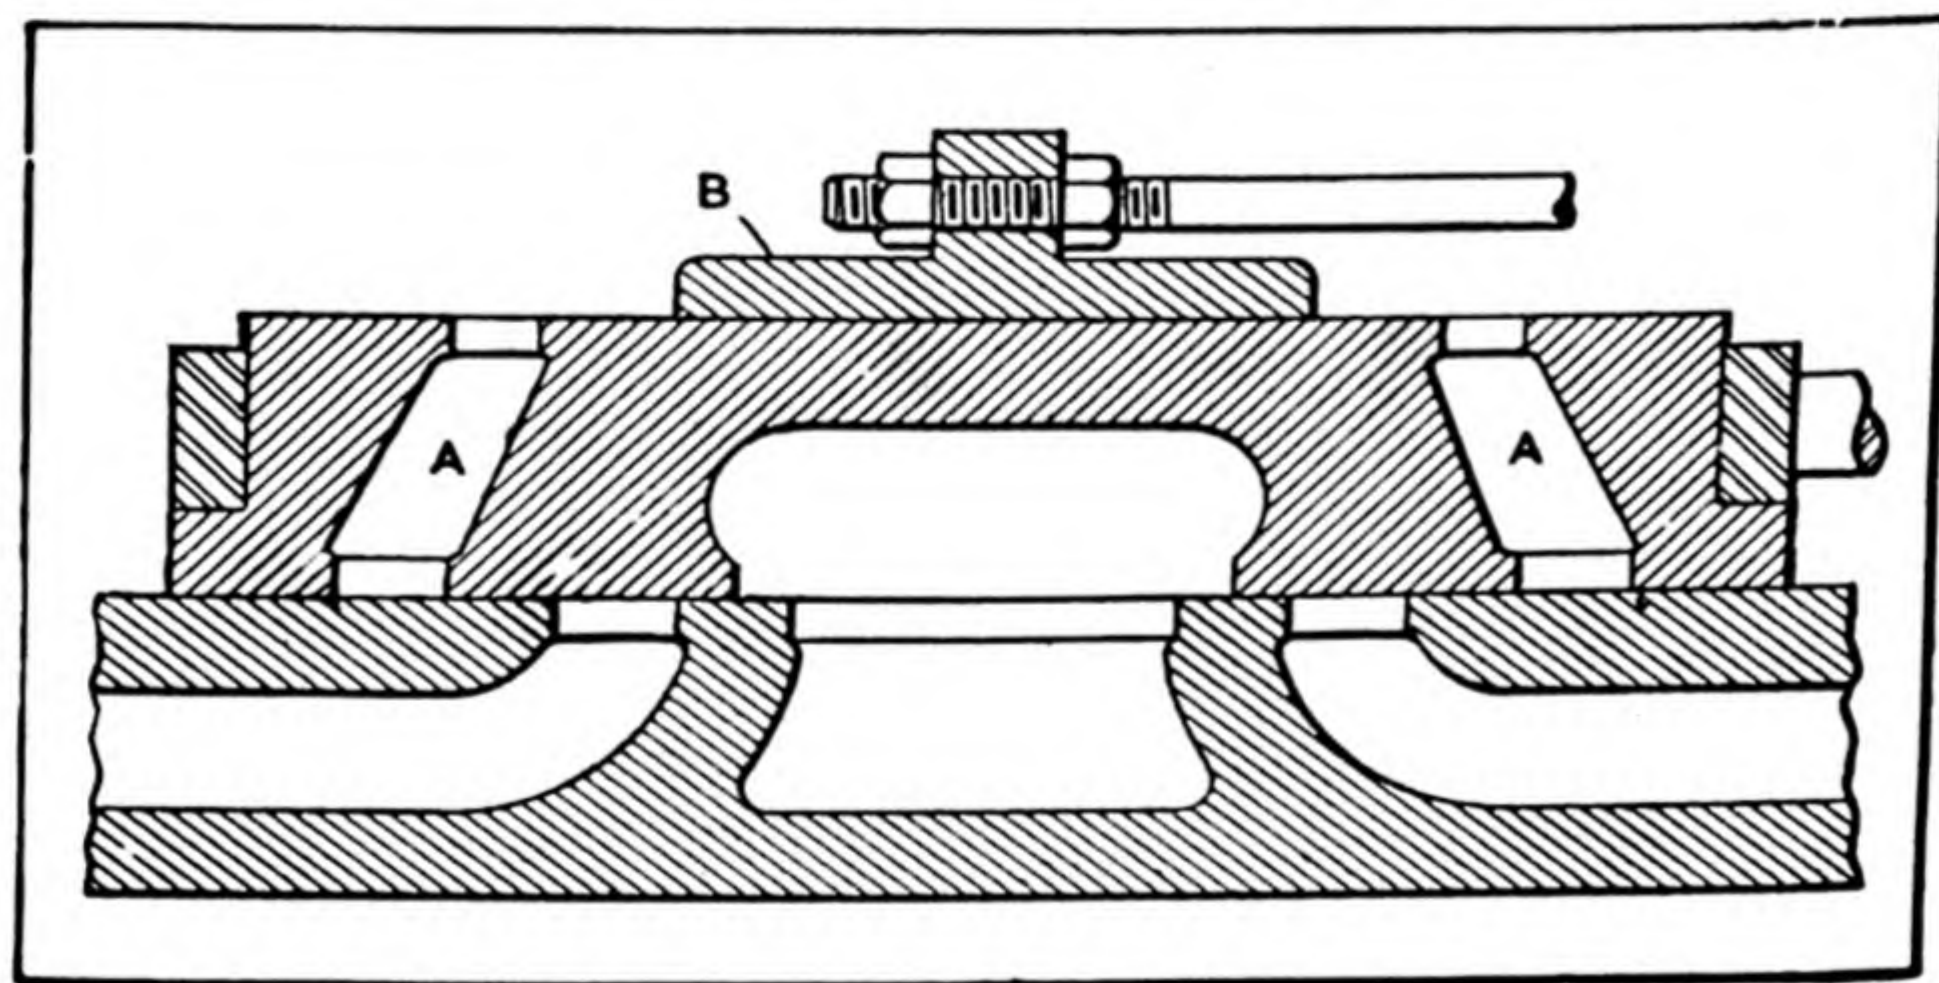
Slide Valve having Auxiliary Cut-off Valve
